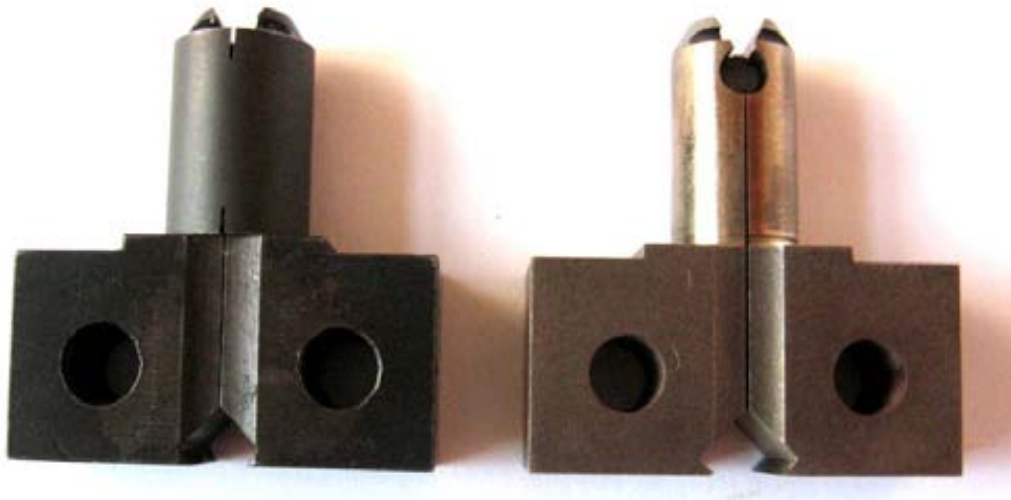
The PLT fixture; a specimen is in place on the left side.
